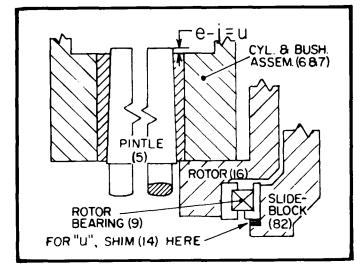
Cylinder "Off-of-Tight" Position. (508644)
